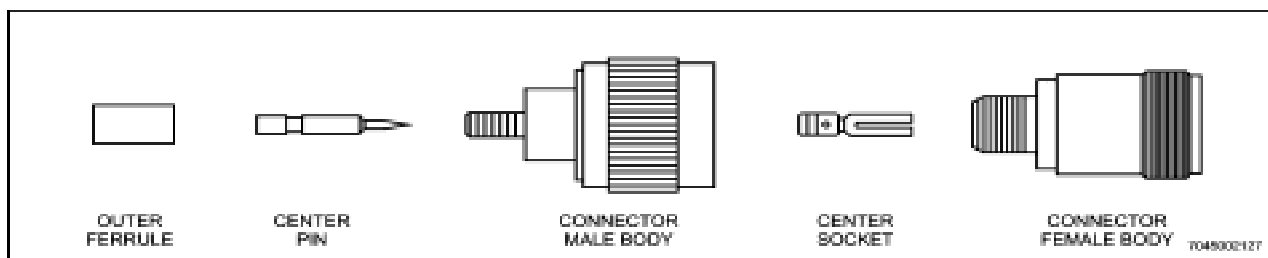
Attaching Series C and SC Connectors to Coaxial Cable
